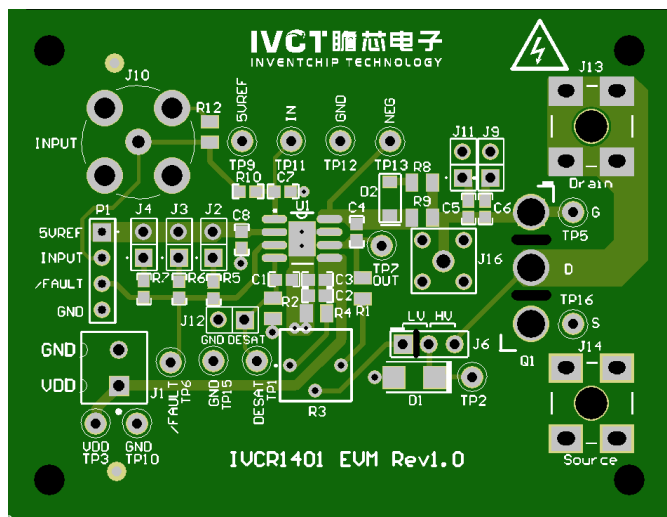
Component Placement — Top Assembly Figure 3. Component Placement — Bottom Assembly
